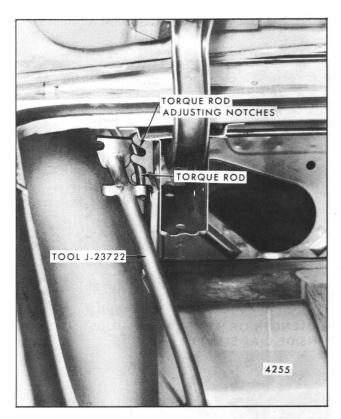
Rear Compartment Torque Rod Adjustment - Cadillac "C-E" and Buick "E" Styles
